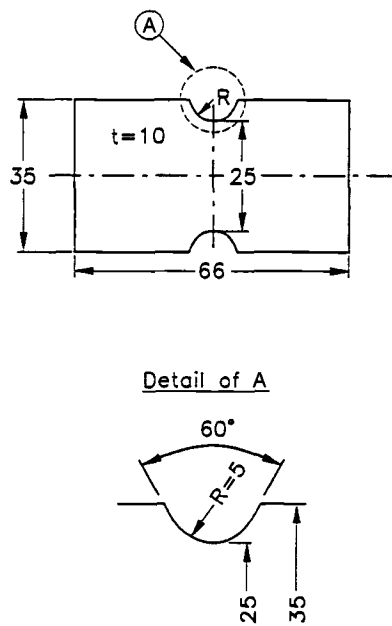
Geometry and dimensions of the double edge notch specimen, all dimensions in millimetres.
